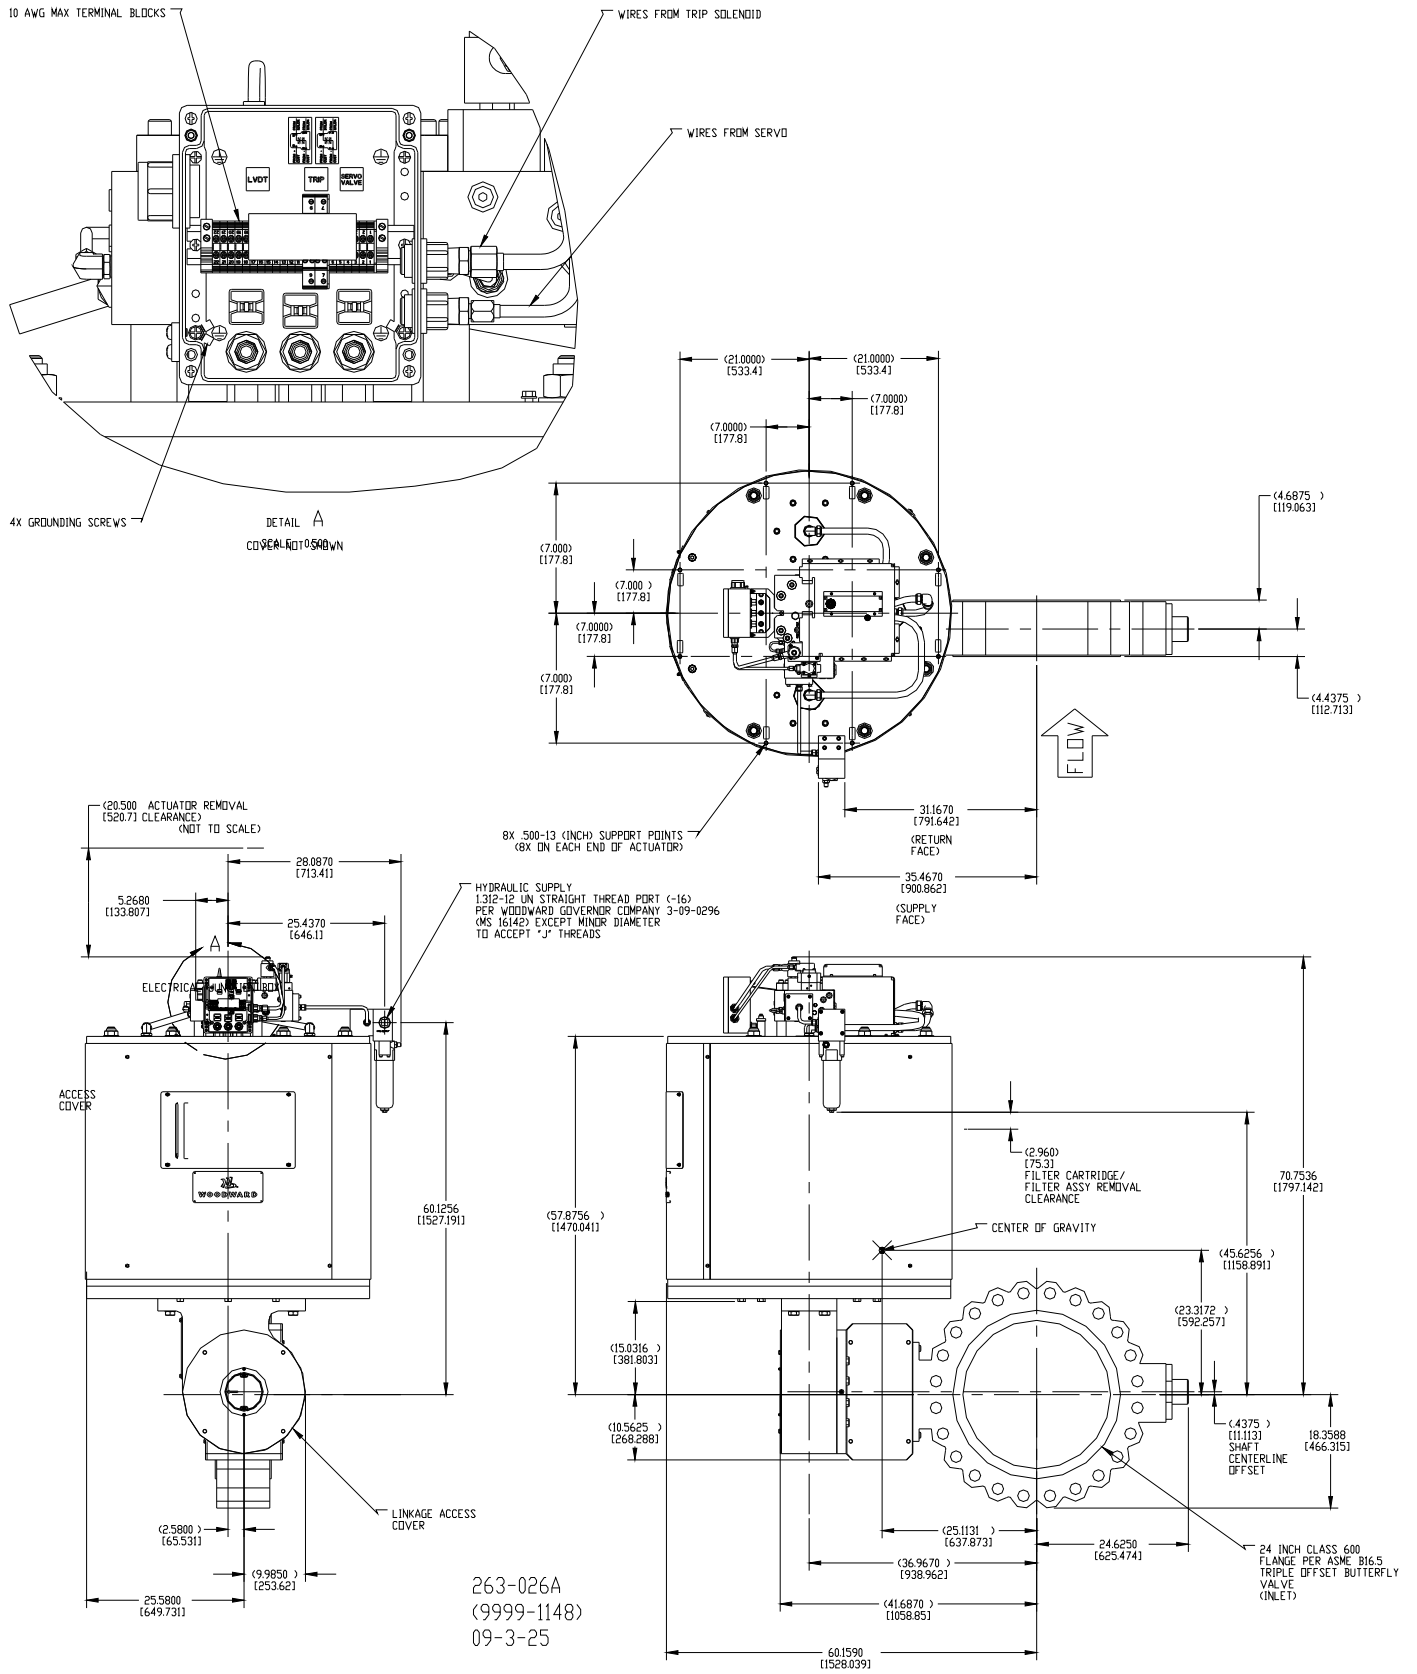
Outline Drawing, 24" valve (9904-948, -949)
